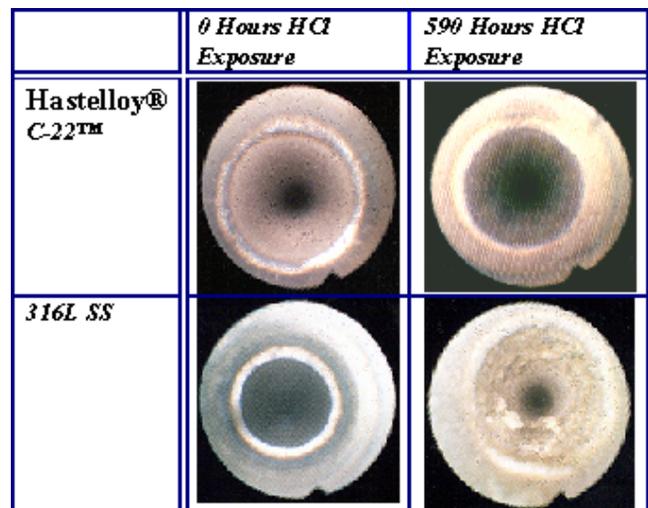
Internal weld of the 1/4" gas sample sticks, before and after exposure to moisture-laden HCl. The circular shape in each photo represents the weld bead of the material.
